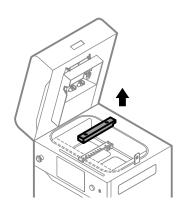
Set the Recoater and remove the screws from the Recoater cover.
